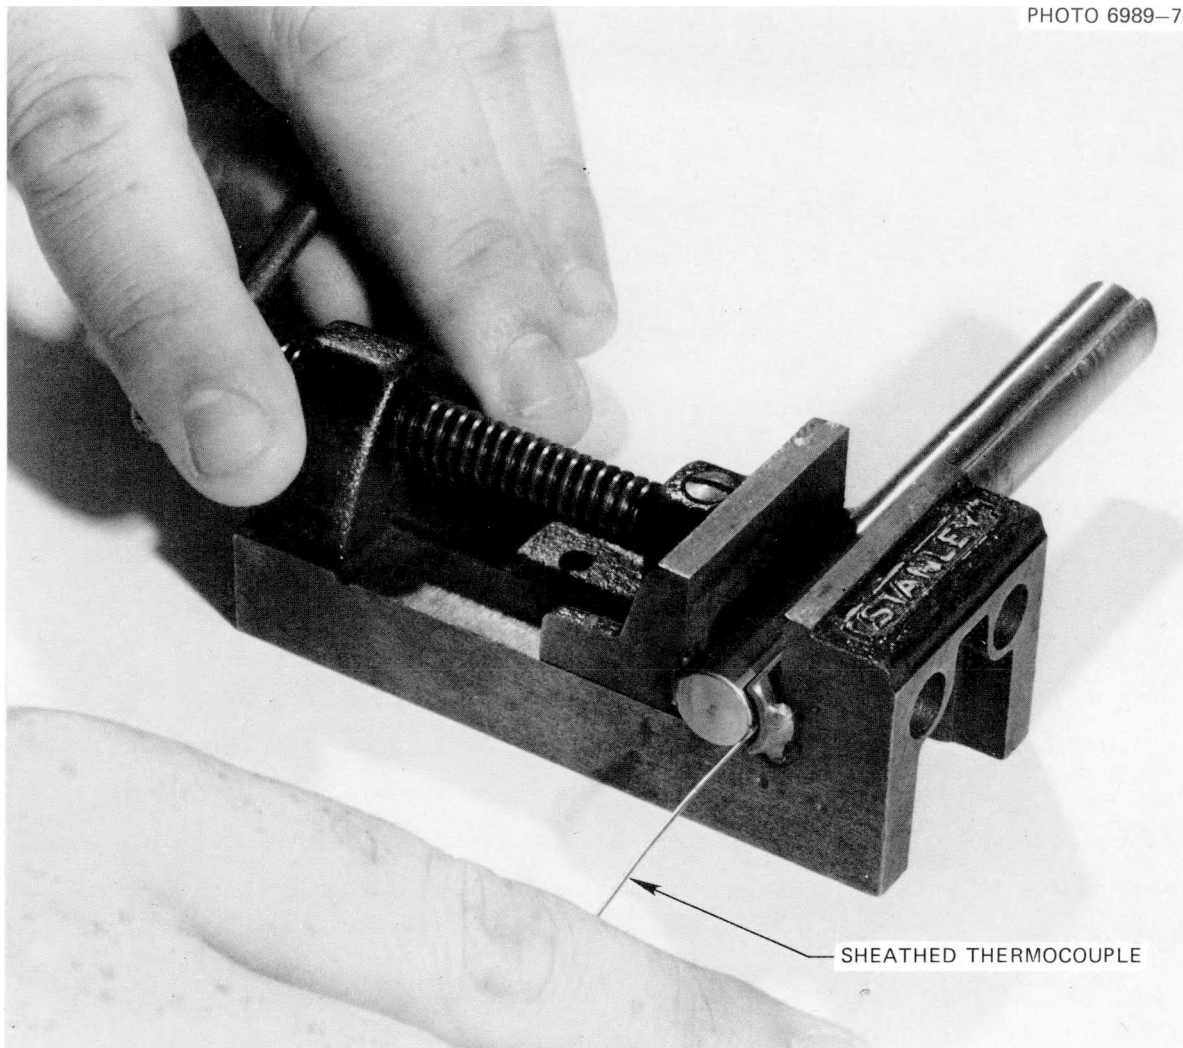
Prototype tool for forming "duckbill" thermocouple junctions.
